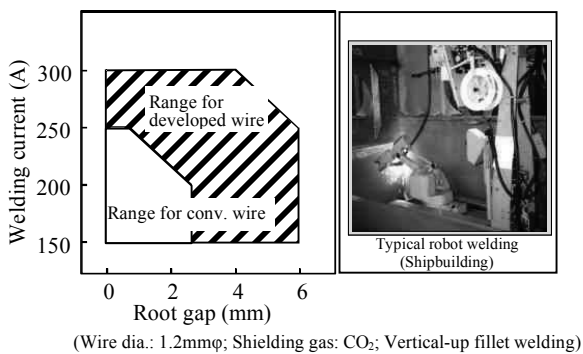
Performance of FCW for vertical-up welding.
